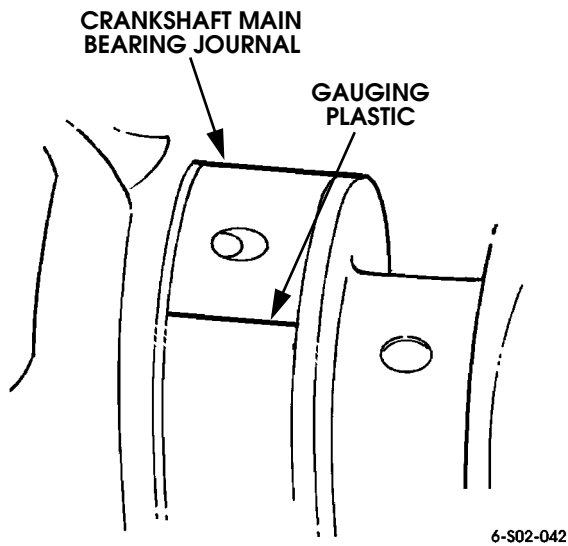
Gauging Plastic Position on Crankshaft Main journal
